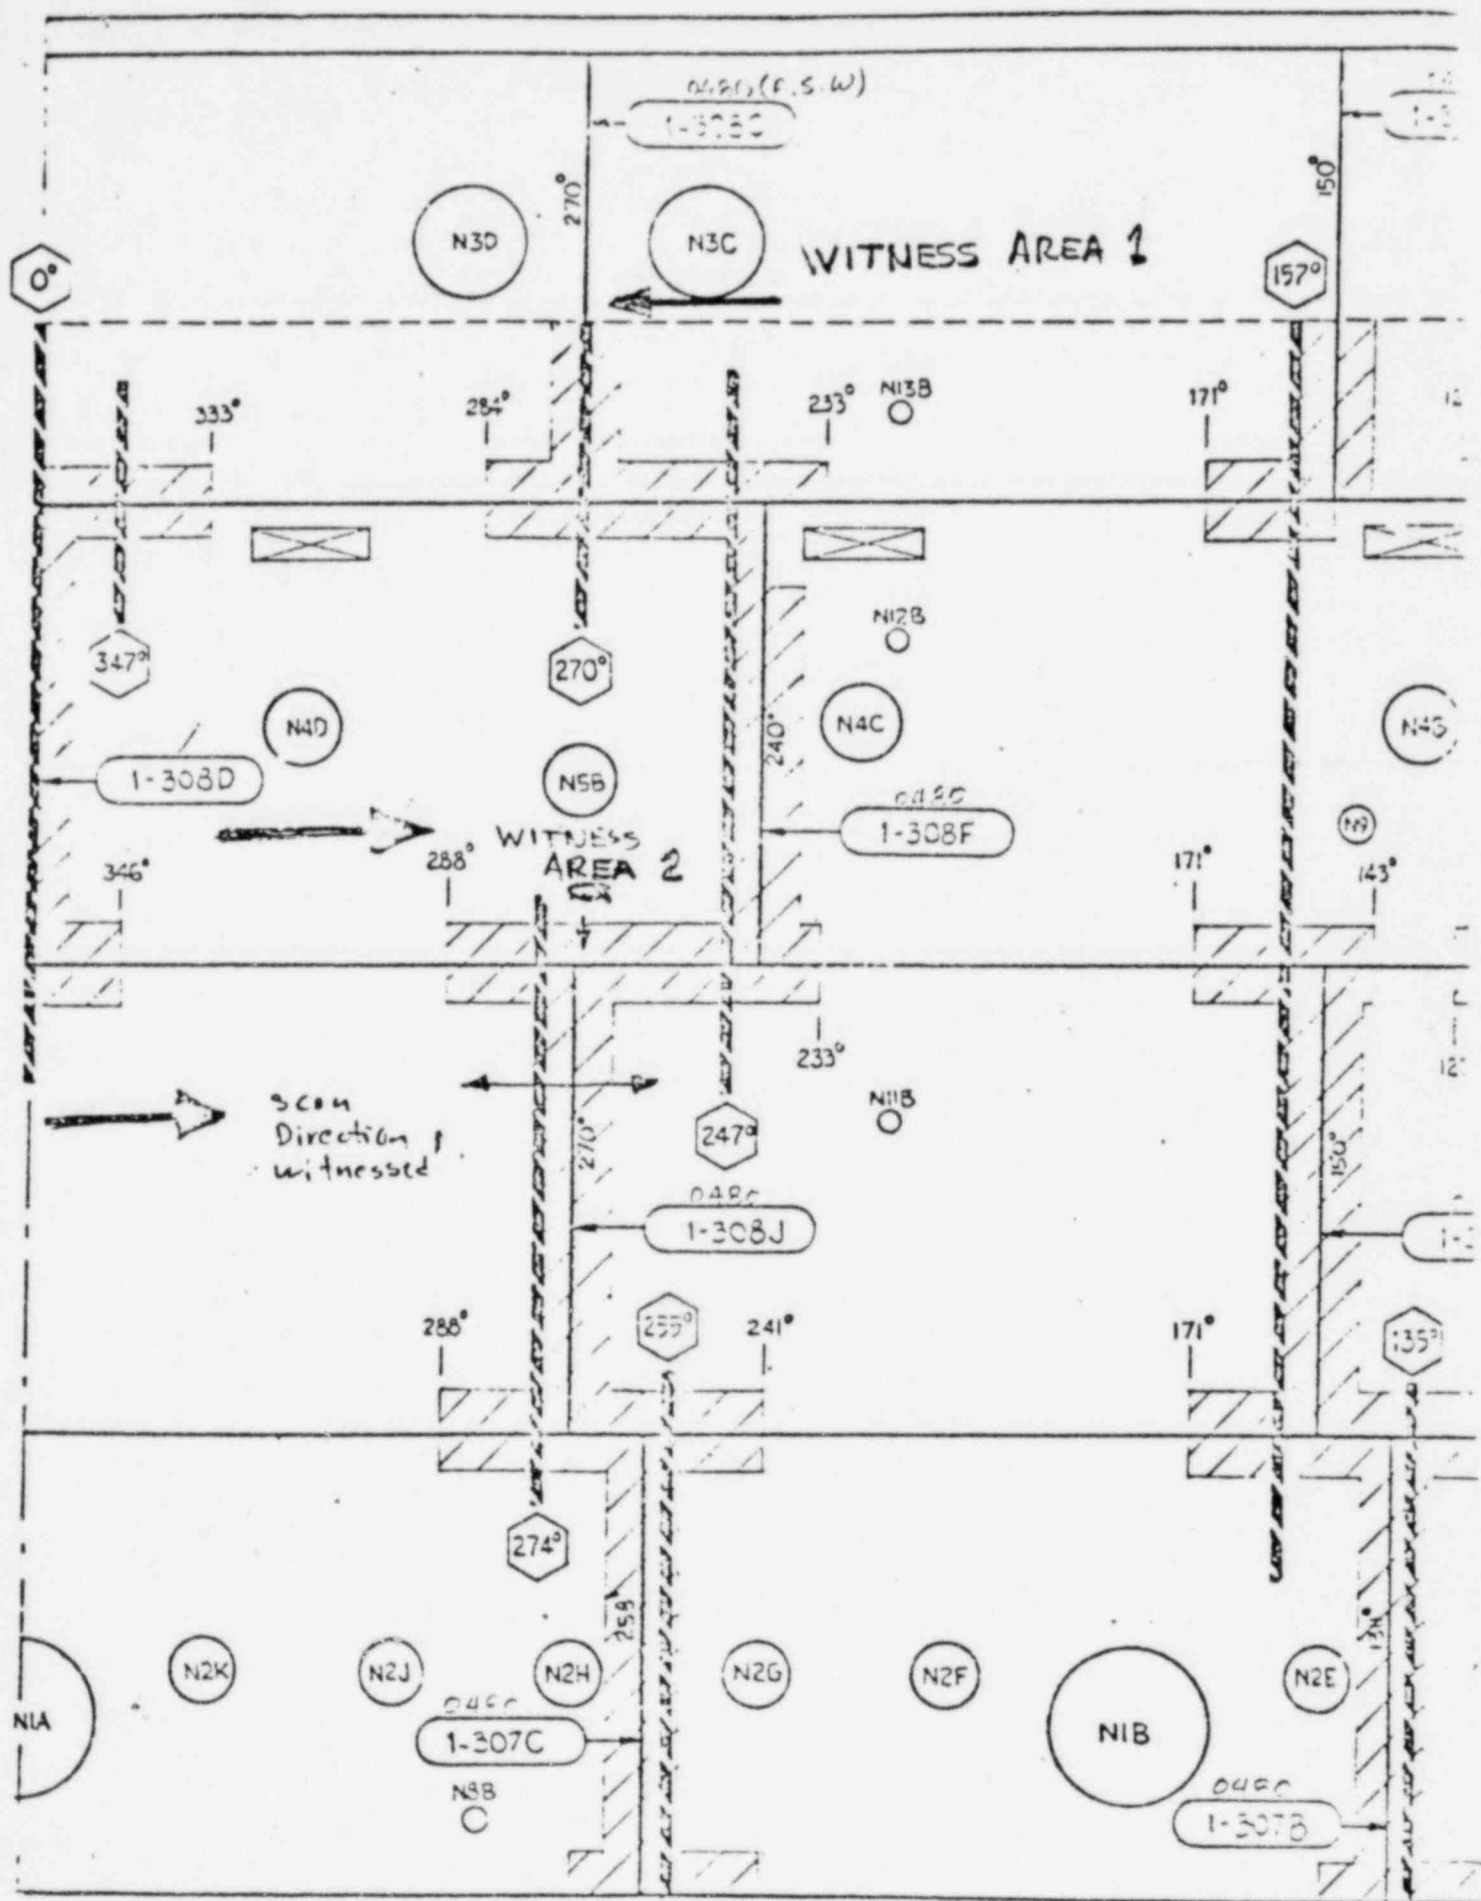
NES Drawing of Vessel Weld Layout and Track Locations showing Witness Areas 1 and 2.
